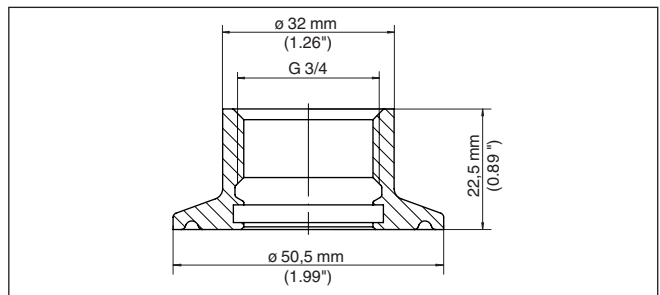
Dimensions of threaded adapter G $\frac{3}{4}$ (DIN 3852-X) on Clamp 1 $\frac{1}{2}$ " (DIN 32676, ISO 2852) PN 16
